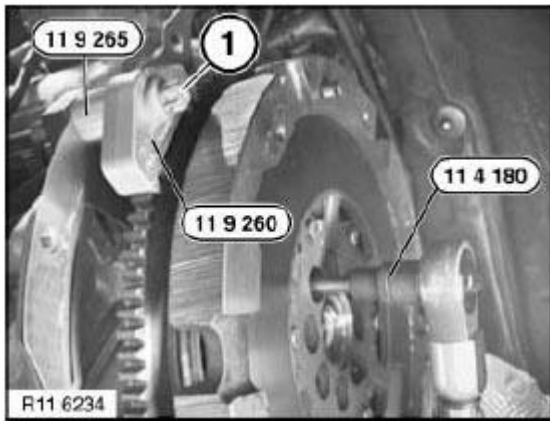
Special Tools (11 9 260), (11 9 265) And (11 4 180)
